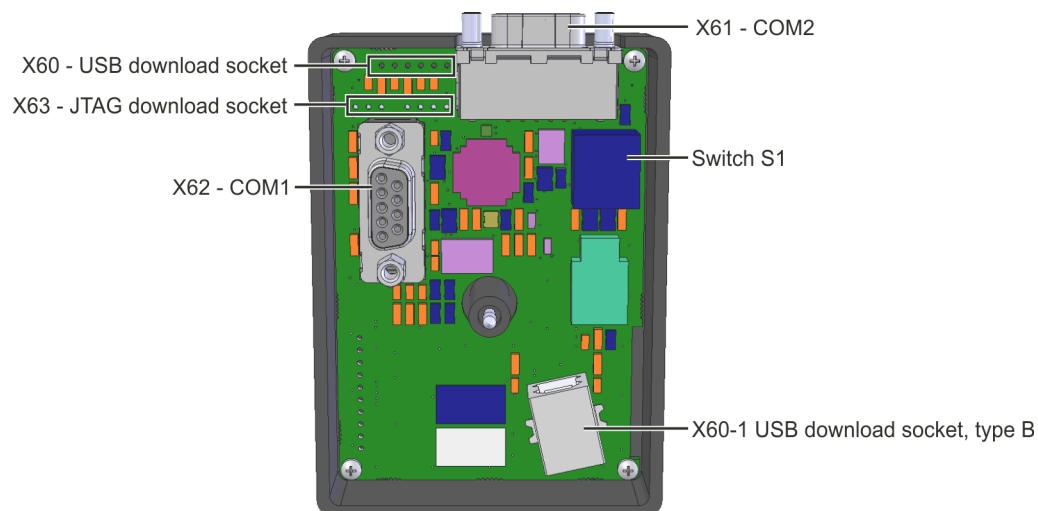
PCB version 036210043.4 (example illustration of operating terminal 0362150)
